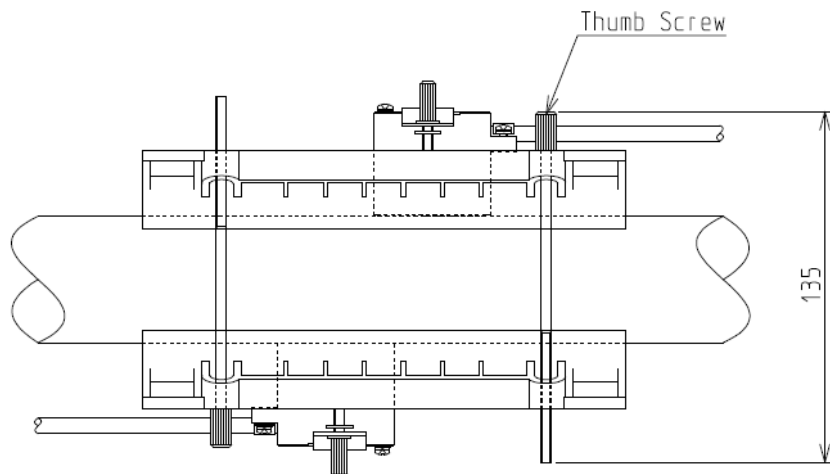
Mounting Fixture for Transducer (Z method)
